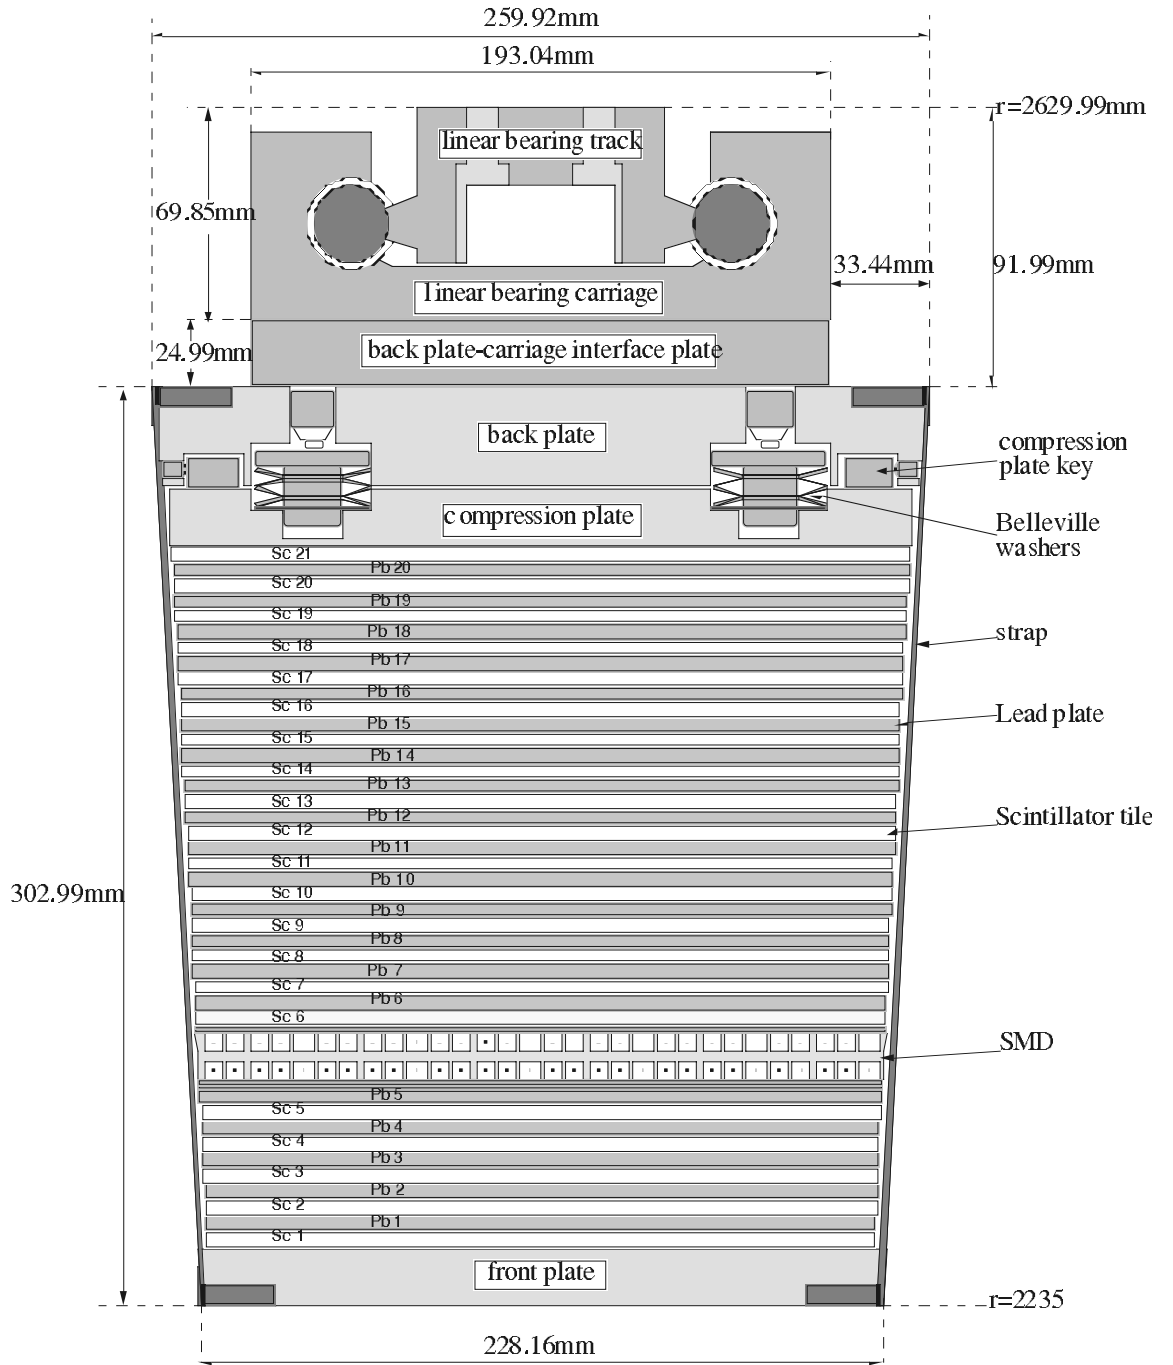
End view of a calorimeter module showing the mechanical assembly including the compression components and the rail mounting system. Shown is the location of the two layers of shower maximum detector at a depth of approximately $5X_0$ from the front face at $\eta = 0$.
